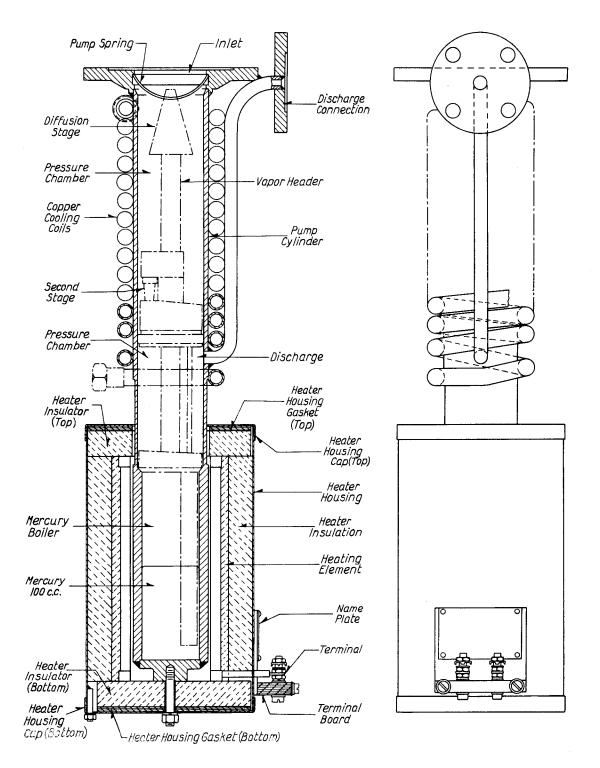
Sectional View of Two-Stage Mercury Vapor Vacuum Pump
